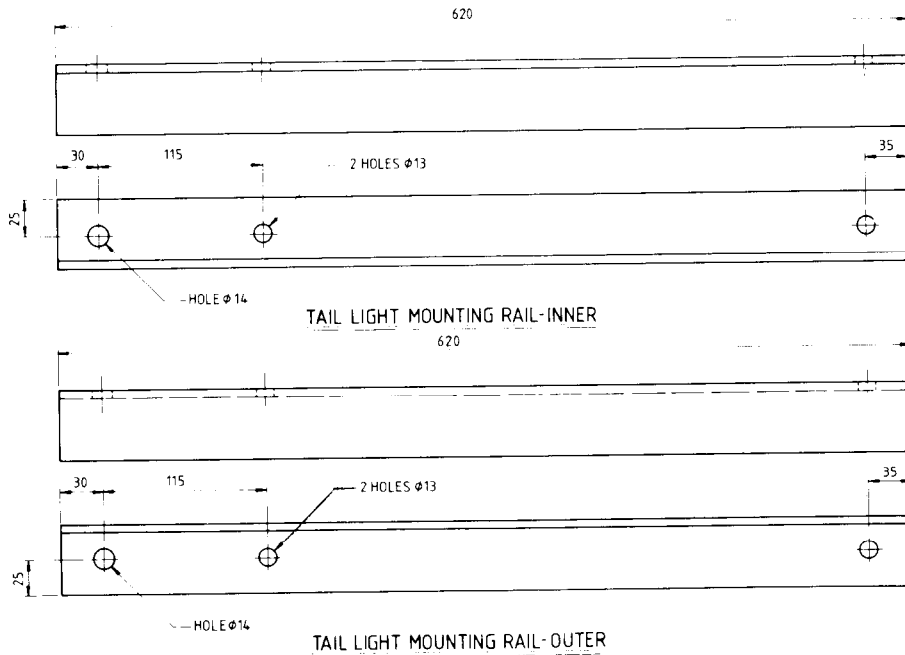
R/H TAIL-LIGHT ASSEMBLY SUPPORT RAILS
